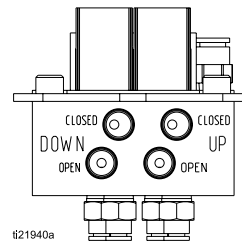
Tubing Connections at Solenoid Manifold, to Pump Outlet Manifold
